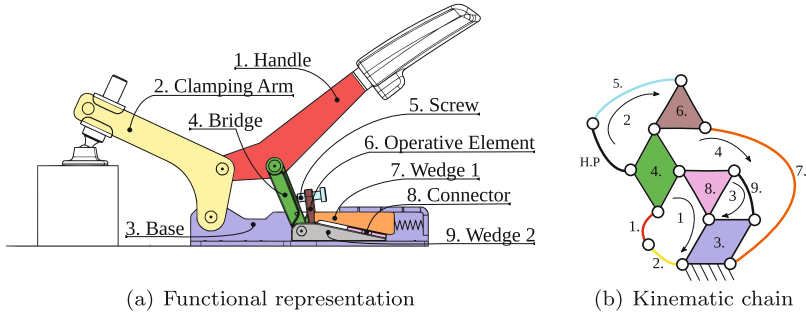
Bessey 1 - auto-adjust toggle clamp.
